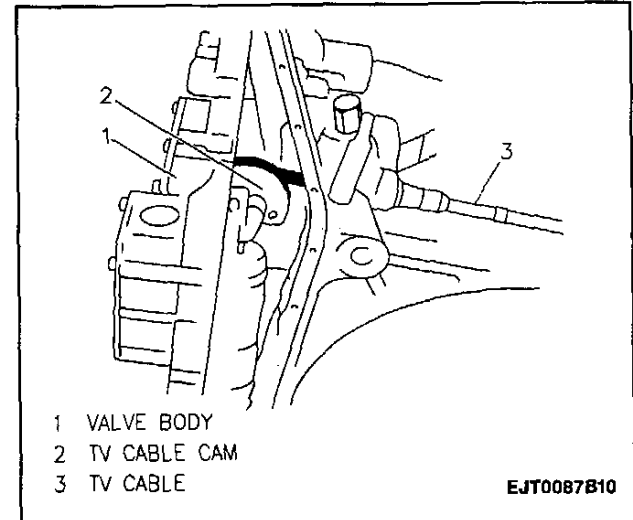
TV Cable Cam (03-72LE, 4-Speed)
